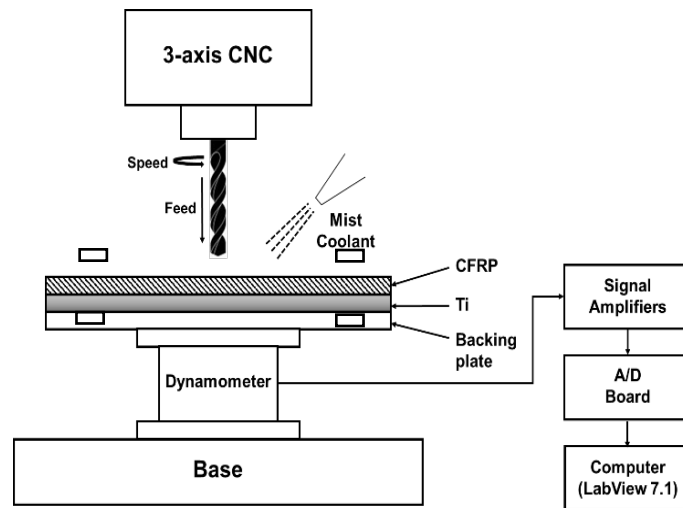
Experimental drilling setup and CNC equipment used for drilling
